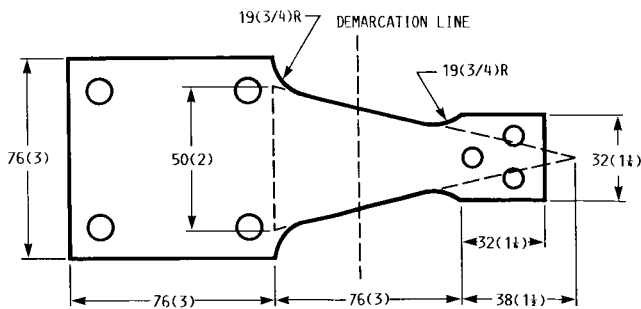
Dimensions of fatigue specimen. (Dimensions are in millimeters (inches)).
